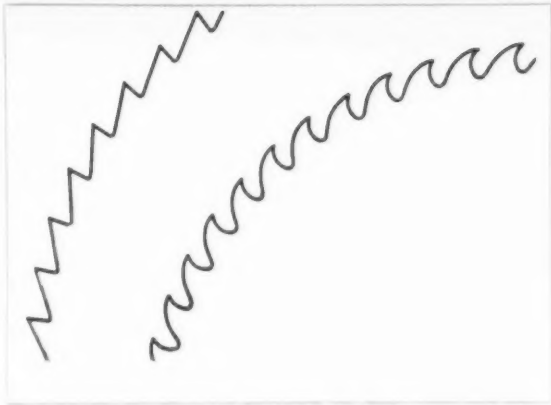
Saw of brush tooth design, right, is preferred over straight tooth type. Curved or hooked teeth seem to have more cutting and less tearing action on the screw head metal.
